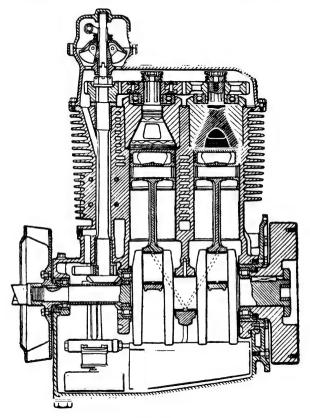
Sectional view of the Hayes-Aspin 12 b.h.p. general purpose engine showing governor and valve gear.
